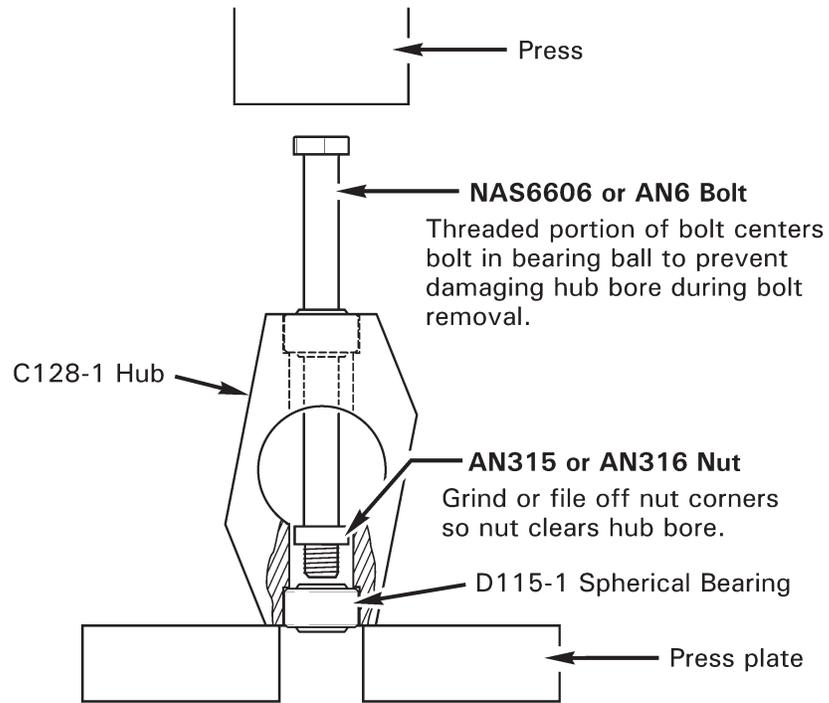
SPHERICAL BEARING REMOVAL
